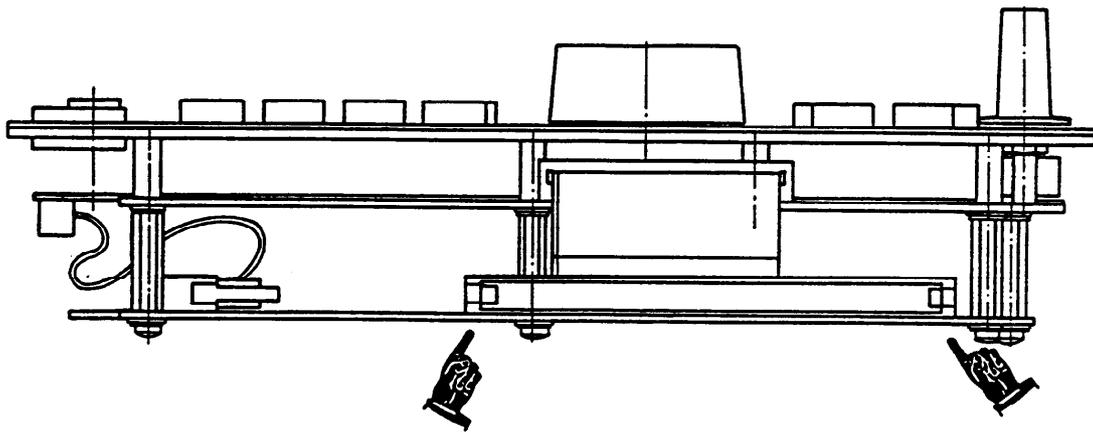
Location of Connector X20 (Control Unit 2)
